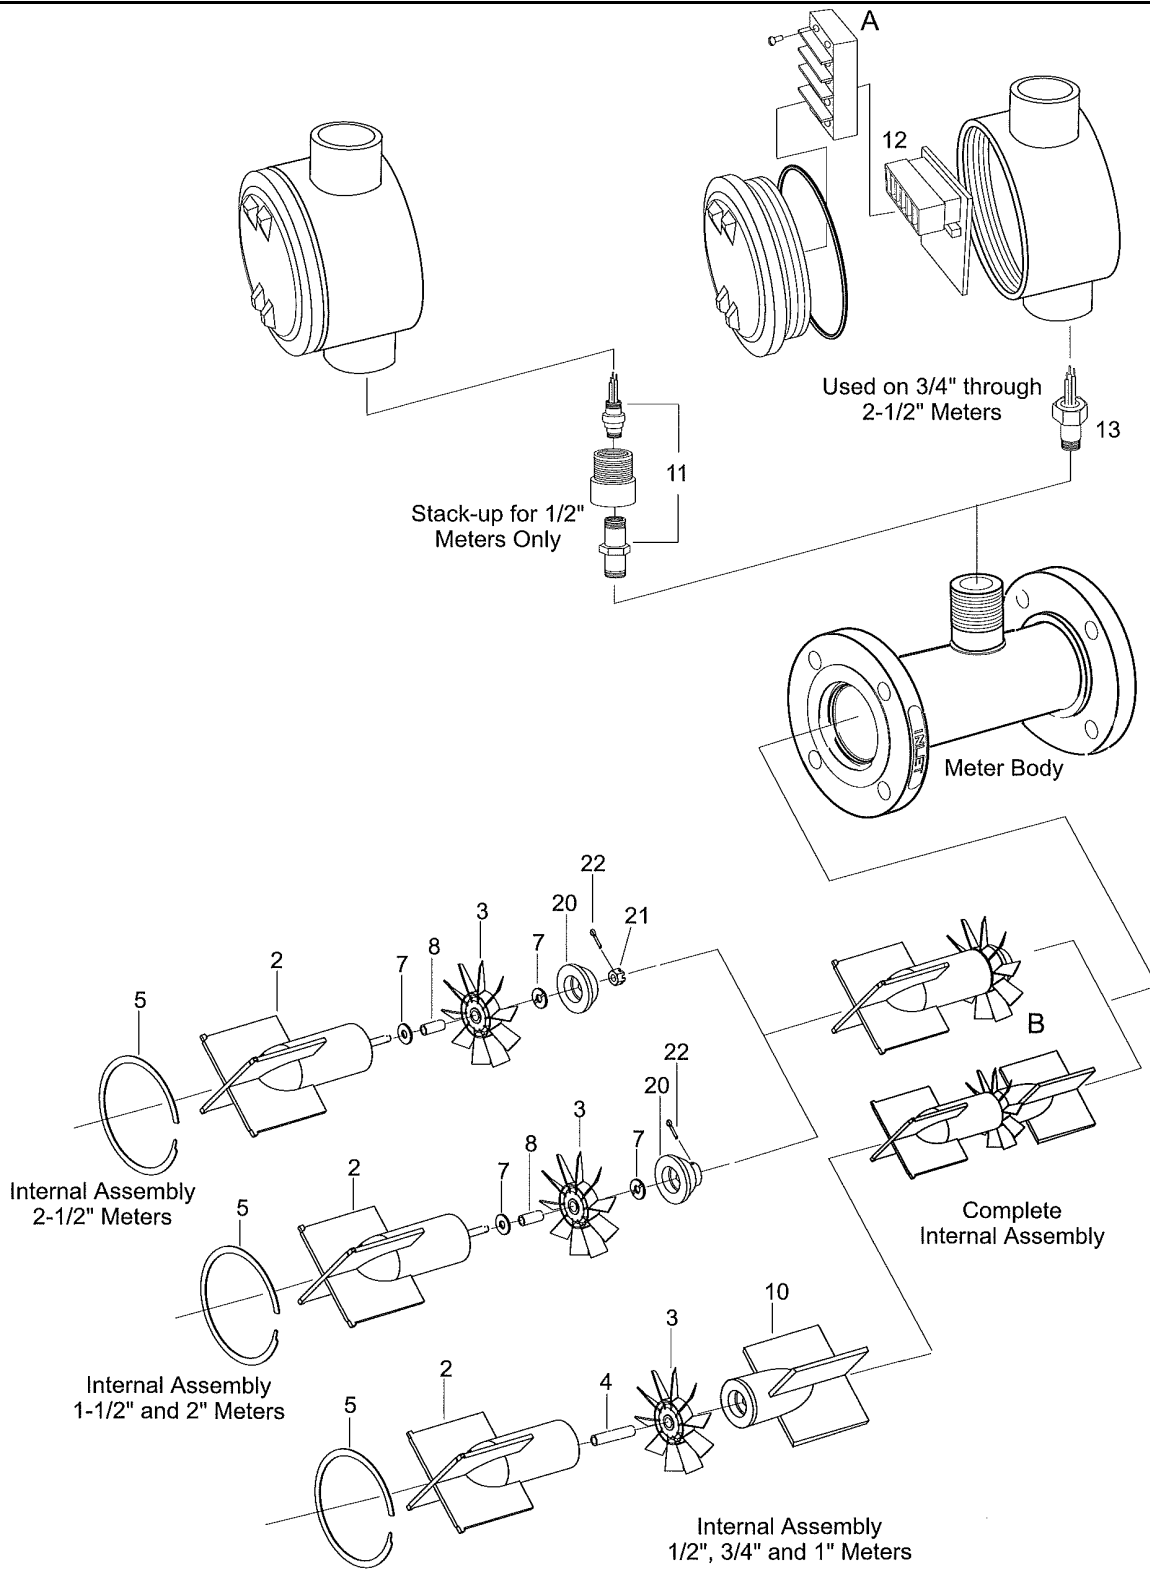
1/2" through 2-1/2" Sizes Assembly Illustration
